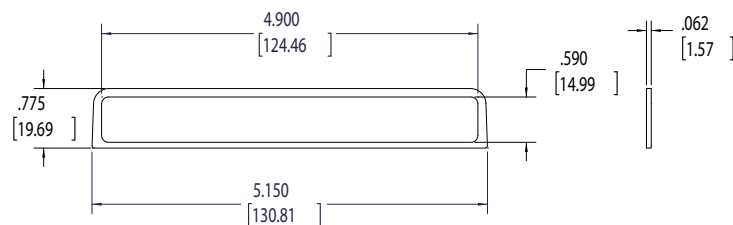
ENCORE OPERATOR GASKET APPLICATOR 31883
